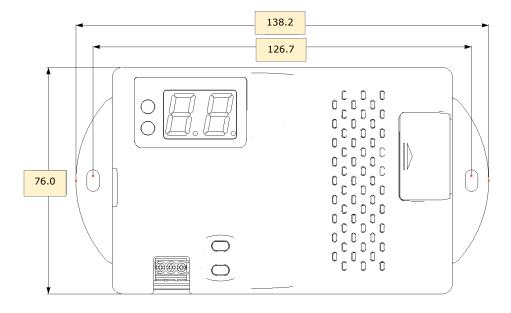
LDSBus Trailing Edge Light Dimmer Dimension – Top View
